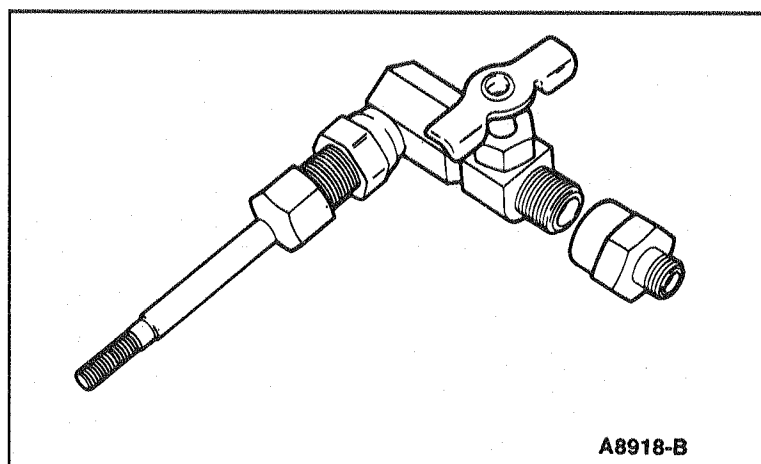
T83T-9000-A Fuel Transfer Pump Pressure Adapter
